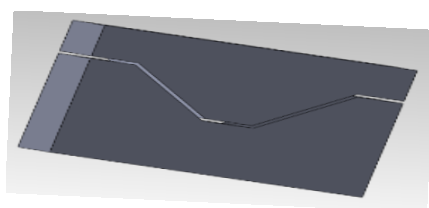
, Three Dimensional Model Of Corrugated Mould software.
